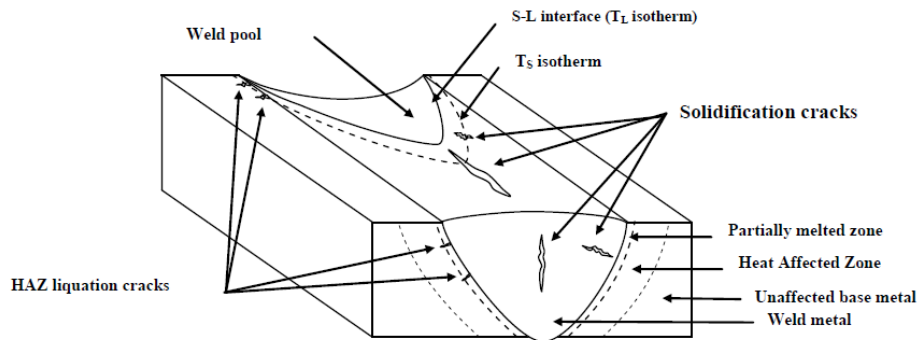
Weld cracking scheme of Inconel 718 alloy [3].
